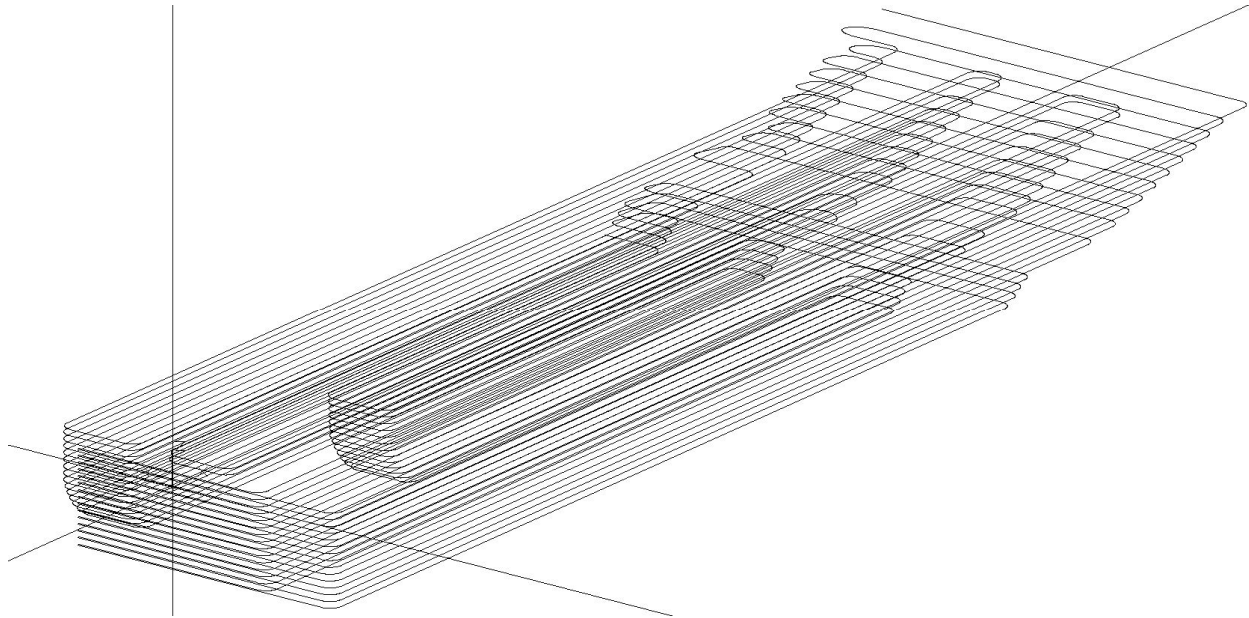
Rough Shaping Tool Path. The rough shaping path establishes a rough outline of the headstock, heel, and the surface of the neck.
